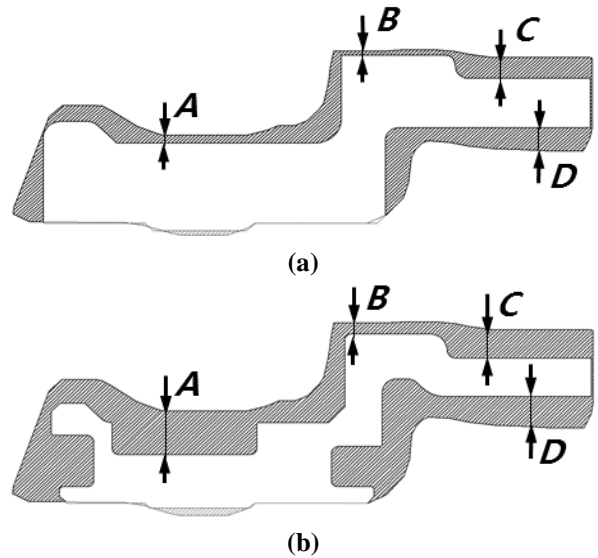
Comparison of deformed shapes with mechanical machining line: (a) rough grinding; (b) finish grinding
